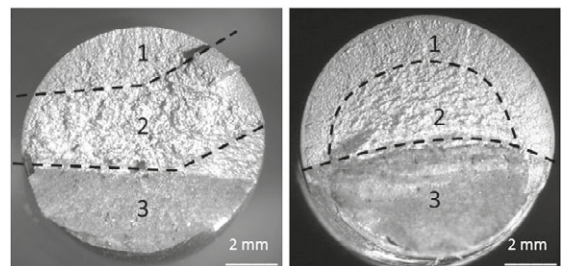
Fracture surfaces of a) uncoated and b) coated specimen showing the regions of 1) slow crack growth, 2) fast crack growth and 3) final fracture.
